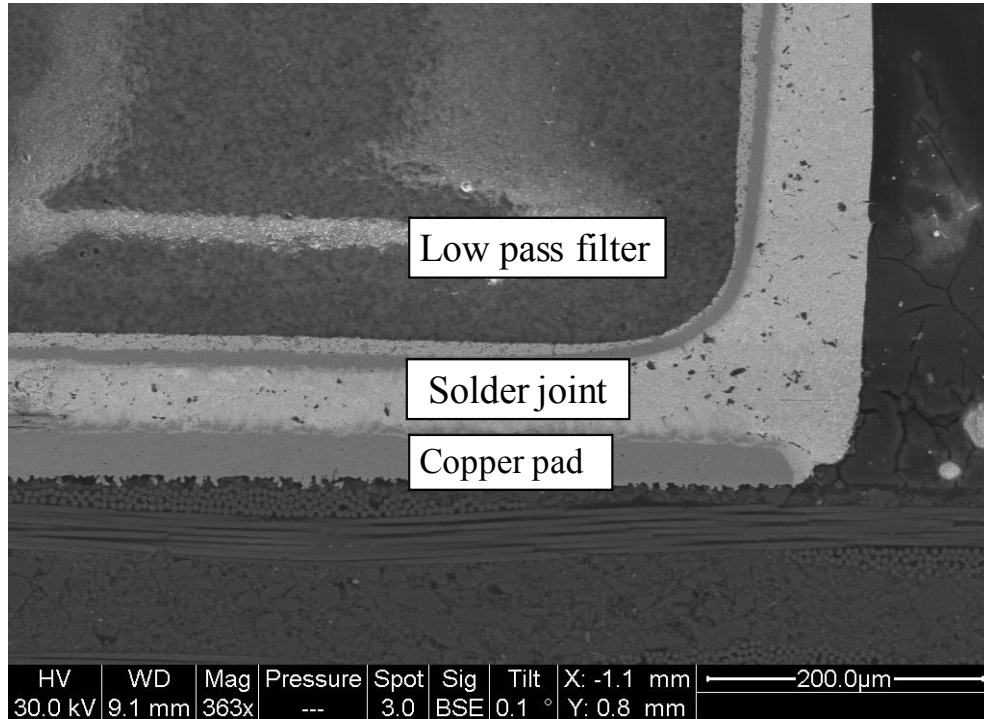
shows several cross-sectional SEM images of the degraded solder joint. A crack, which initiated at the surface and propagated inward, may be clearly observed in Figure 13 (a). The crack has opened on the side of the solder joint where the shear force was applied, and propagated towards the center, consistent with the direction of the applied shear force, as seen at higher magnification in Figure 13 (b). On the other hand, the opposite side of the solder joint was still intact, as shown in Figure 13 (c) with the possible exception of a micro-crack near the outside corner of the copper pad.
